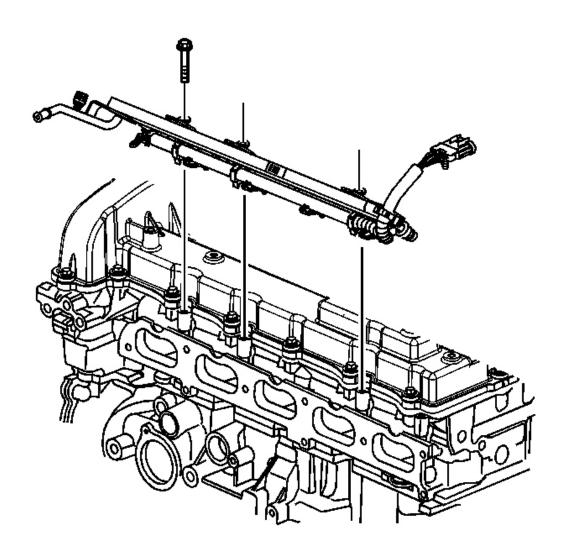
Identifying Fuel Injector Rail Bolts Courtesy of GENERAL MOTORS CORP.
